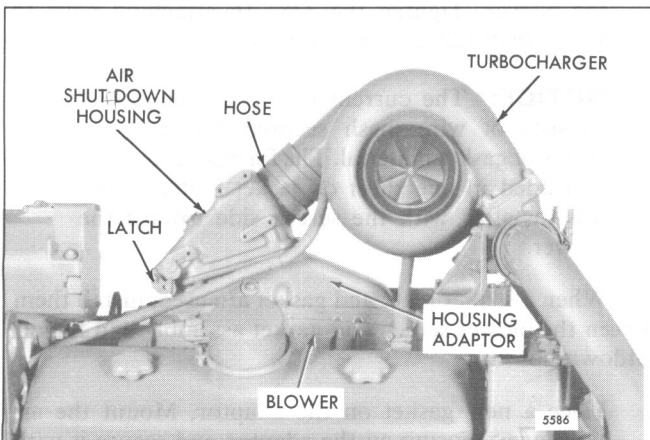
Typical Air Shutdown Housing Mounting (Turbocharged Engine)
